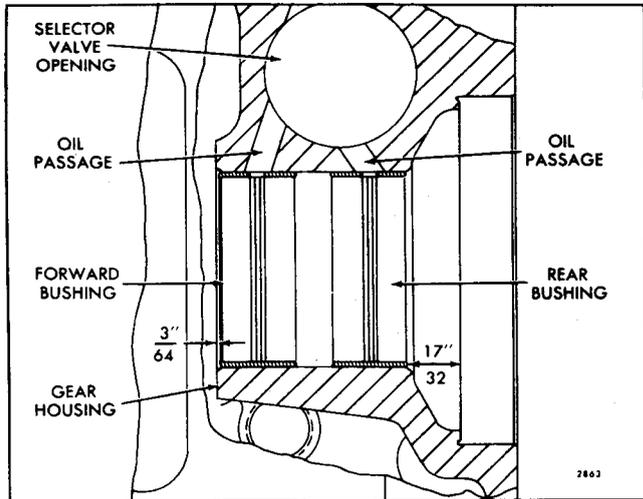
Location of Planetary Gear and Reduction Gear Input Shaft Bushings in Reverse Gear Housing
